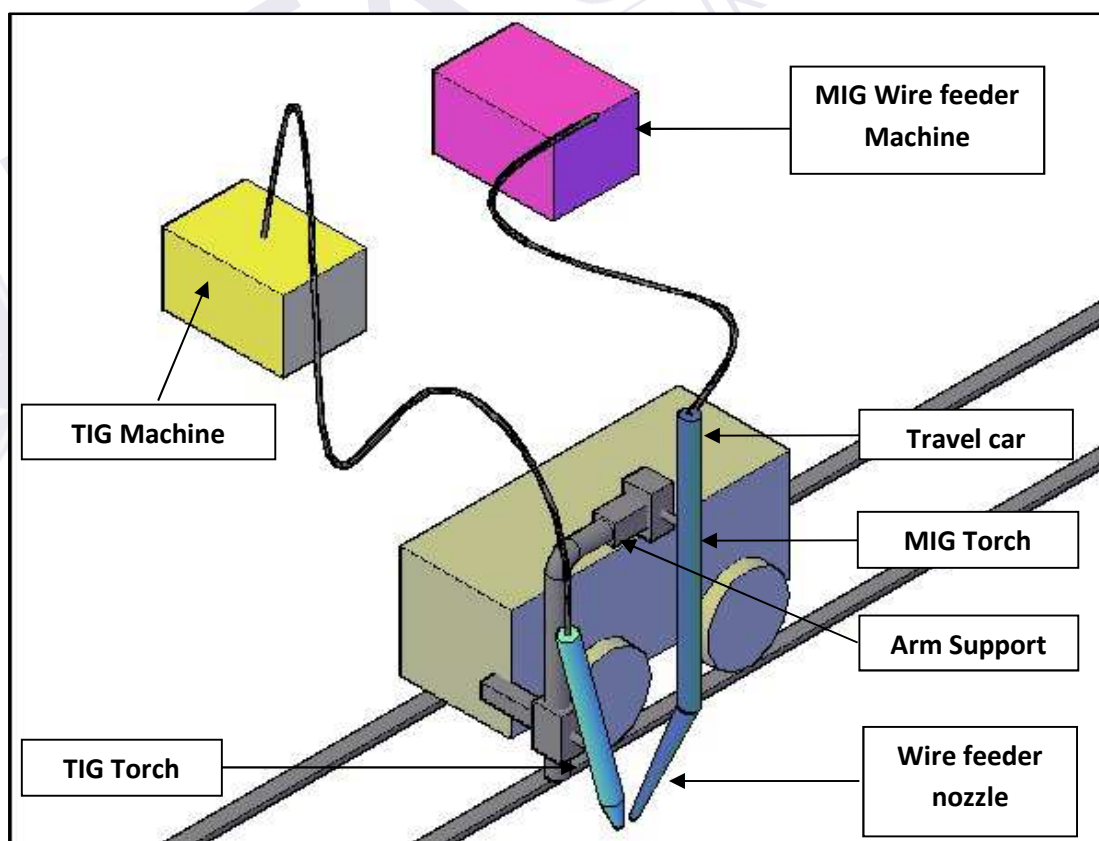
Semi-automatic TIG machine schematic drawing by AutoCAD
